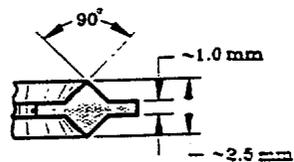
Minor Dimensions of the 1100 Aluminum "Diamond Seal" used in the Seal Test Program.
